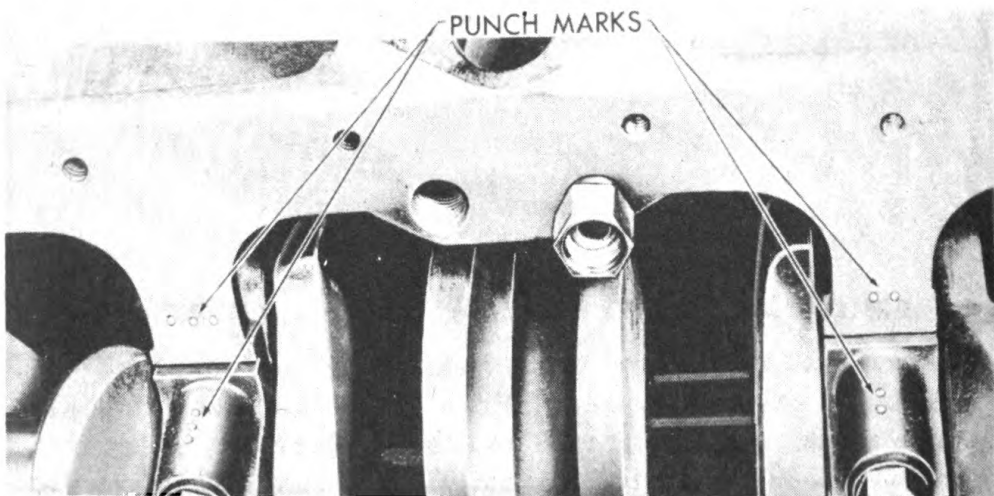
Punch Marks on Cylinder Block and Crankshaft Bearing Caps
